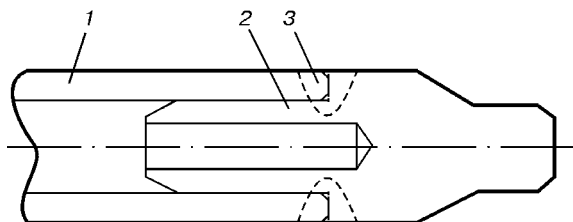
Schematic of a welded joint of a fuel element designed for WWER type reactors at EBW: 1 — cladding; 2 — plug; 3 — weld
